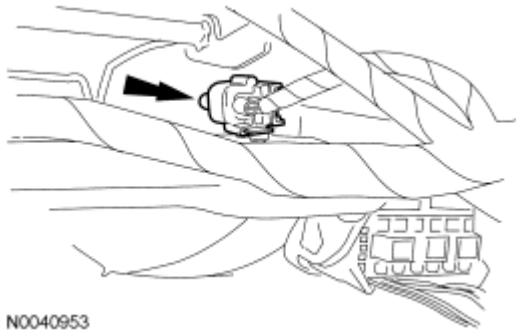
Locating Passenger Seat Side Air Bag Module Electrical Connector
